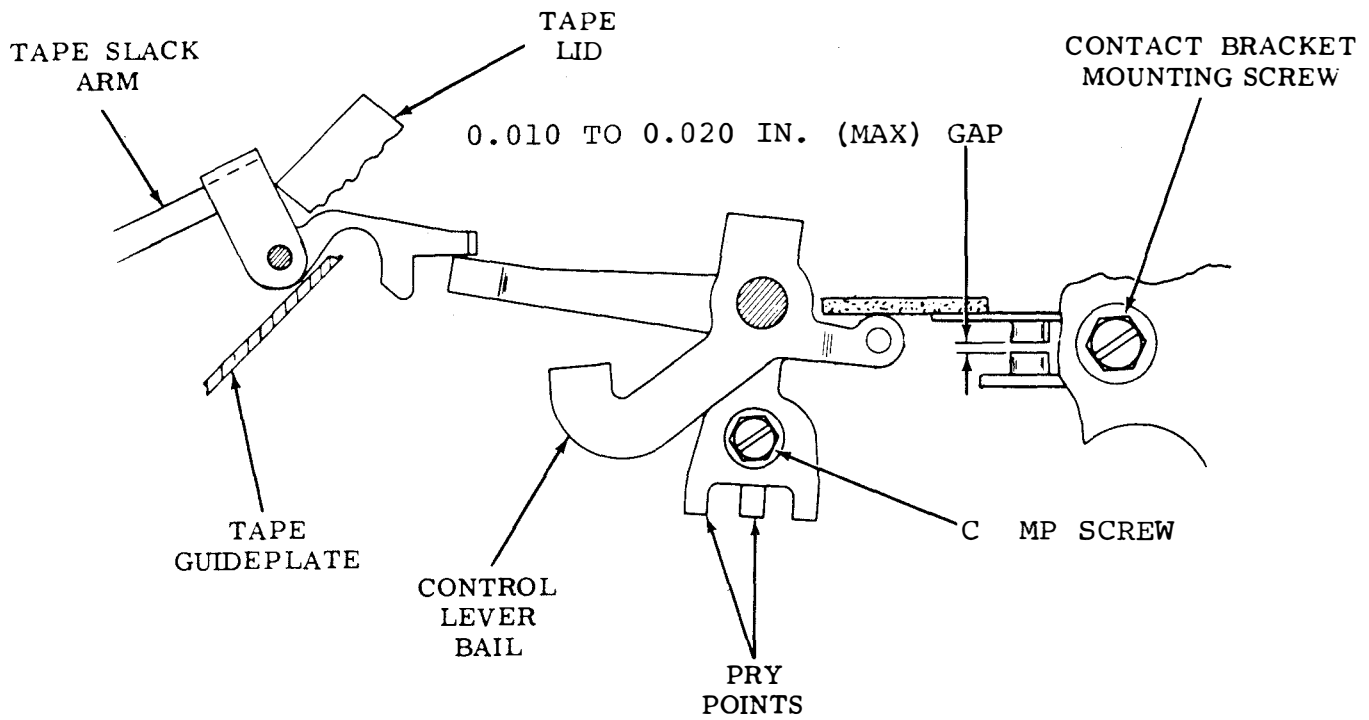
Tape Slack Arm Adjustment and Contact Gap, Rear View
